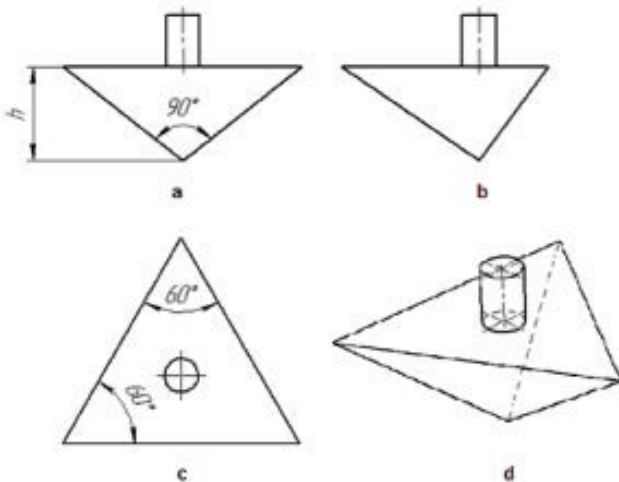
Indenter construction a- front, b- profile, c- horizontal plan, d-general view
